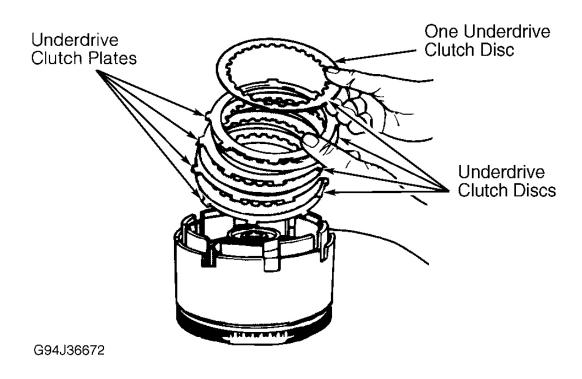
Installing Underdrive Clutch Plates & Discs Courtesy of CHRYSLER LLC
